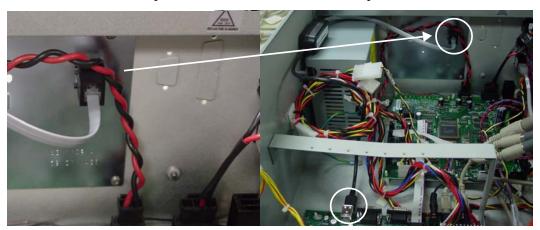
Connecting the cable to the coupler inside the PC box; completing cable routing in PC box
